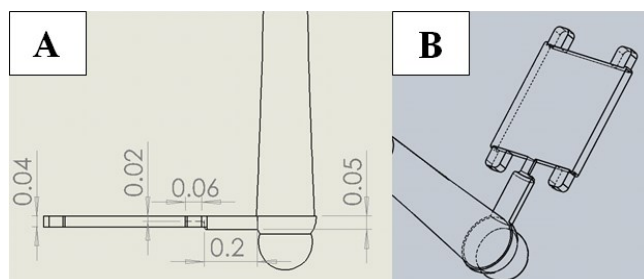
Schematic of molded part dimensioned (A) and with an isometric view (B). Units are given in inches.
